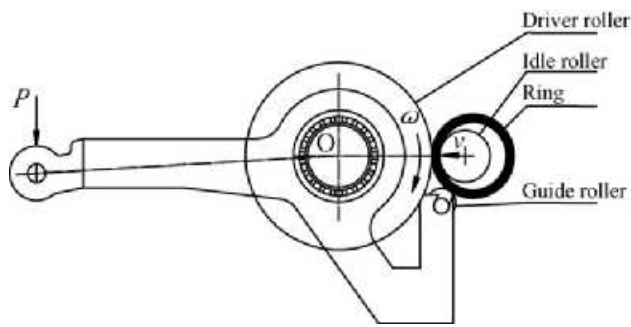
Schematic diagram of cold ring-rolling mill with single following guide roller.
